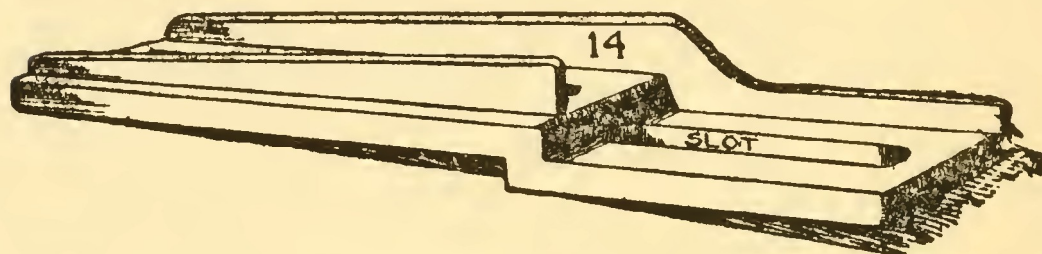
SKETCH OF EXTENSION PIECE (NO. 14).
